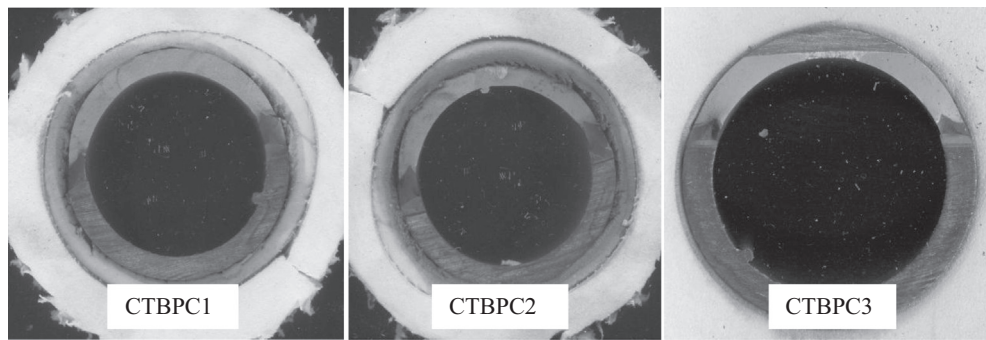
Coiled tubings blunt notched fracture surface. Precracked coiled tubing specimens.
